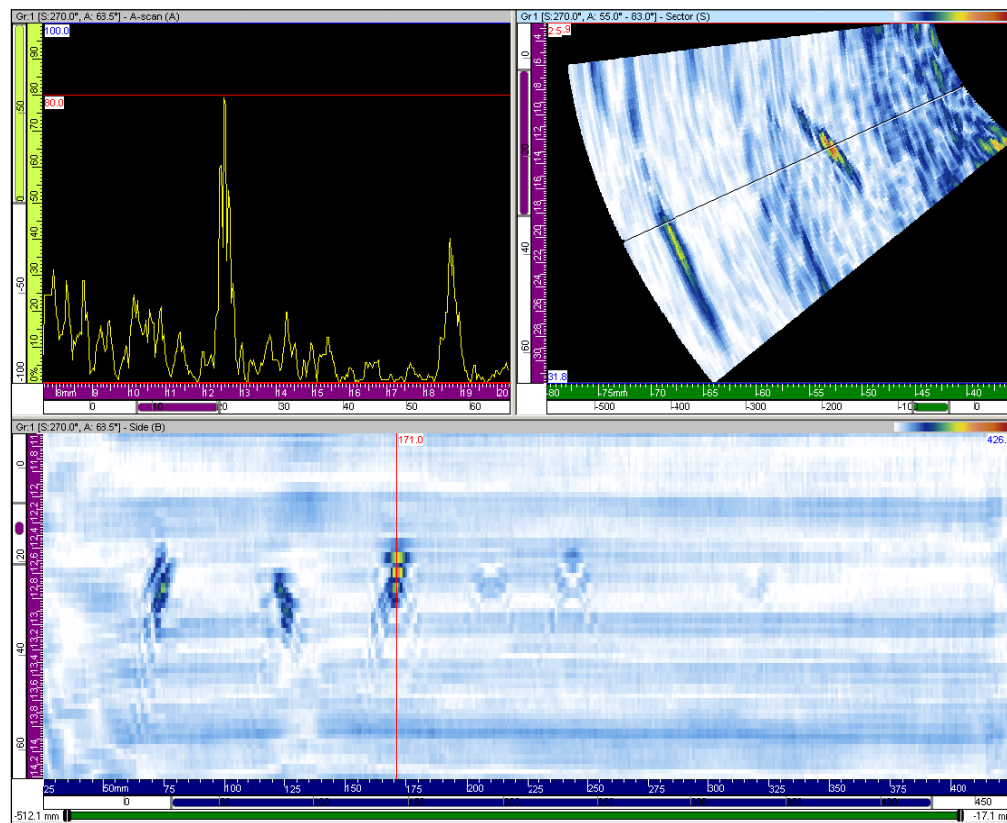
Signals from the aluminium discs located on one fusion face of the weld.
